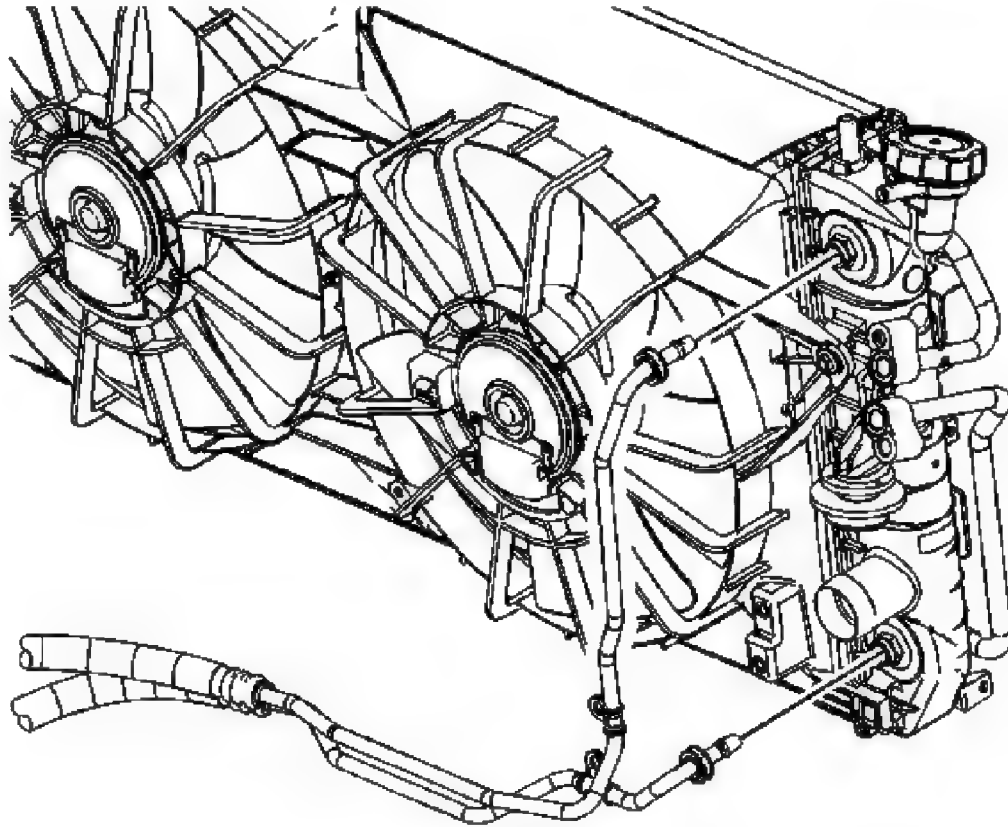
Removing/Installing Transmission Oil Cooler Lines
